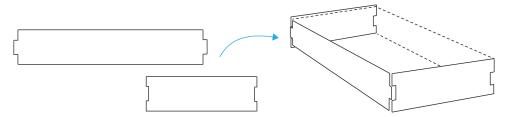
Shapes cut from a plate with a laser cutter or waterjet cutter can be assembled into three-dimensional objects
